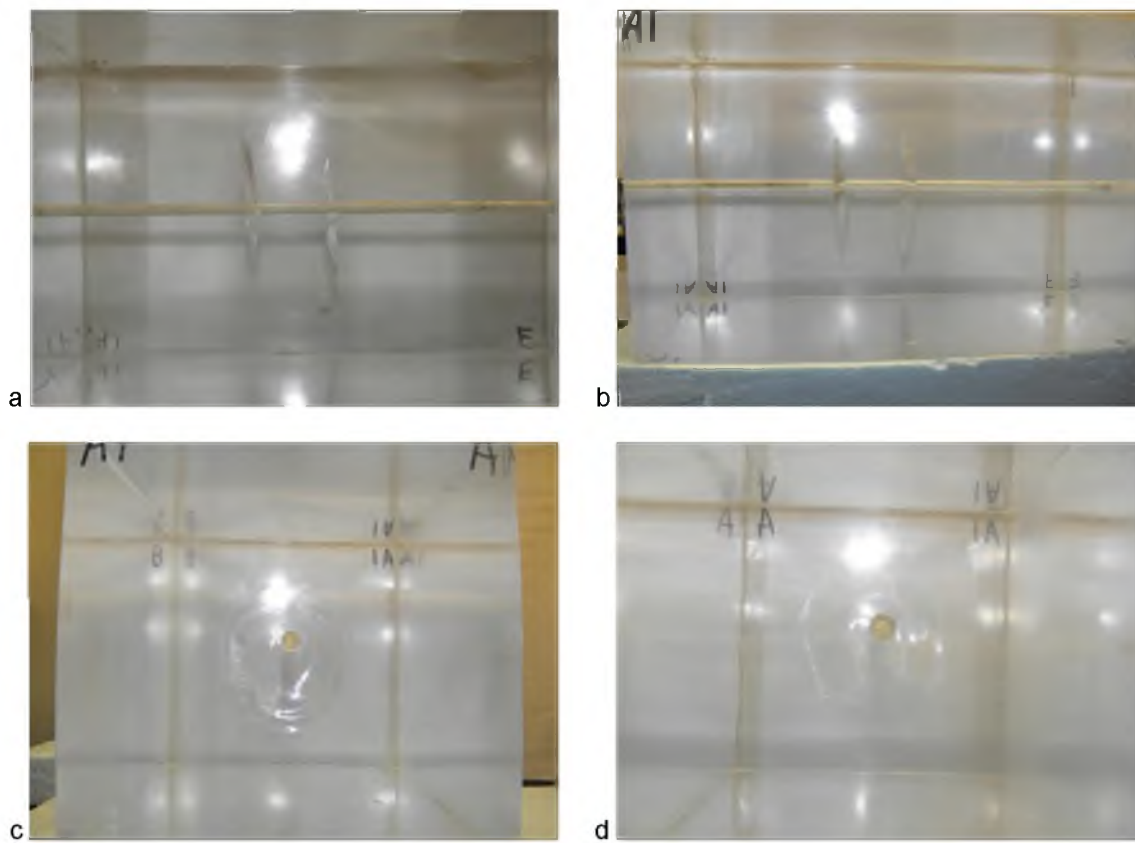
A1 post thermal fracture pictures. a) Max stress view. b) Horizontal view. c) Axial view side A. d) Axial view of side B.
